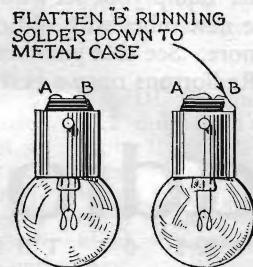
How to alter the soldering on a double contact bulb to make it single.
